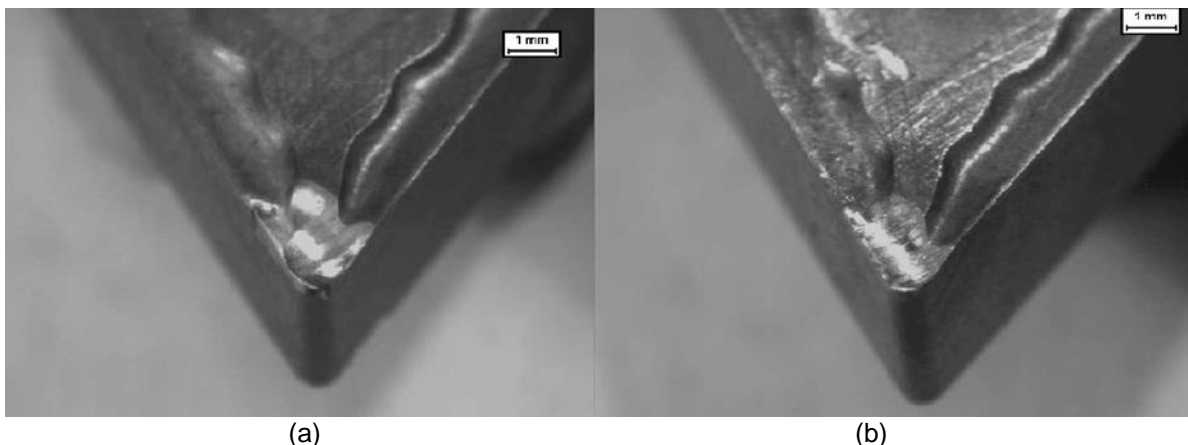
Cutting edges of tool worn after machining (a) AISI 4140 and (b) AISI 316 steels, probably edge rounding.
